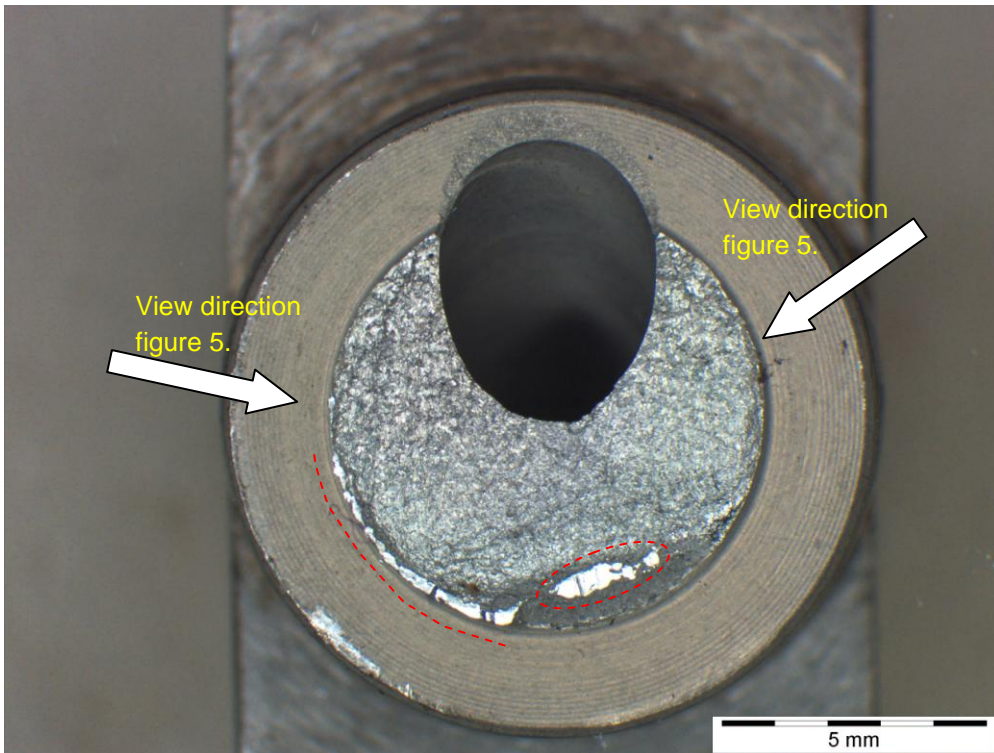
Fracture part A; The shaft is fractured in the radius from collar to shaft. The blinking areas (red markings) represents mechanical damaged fracture surface.
